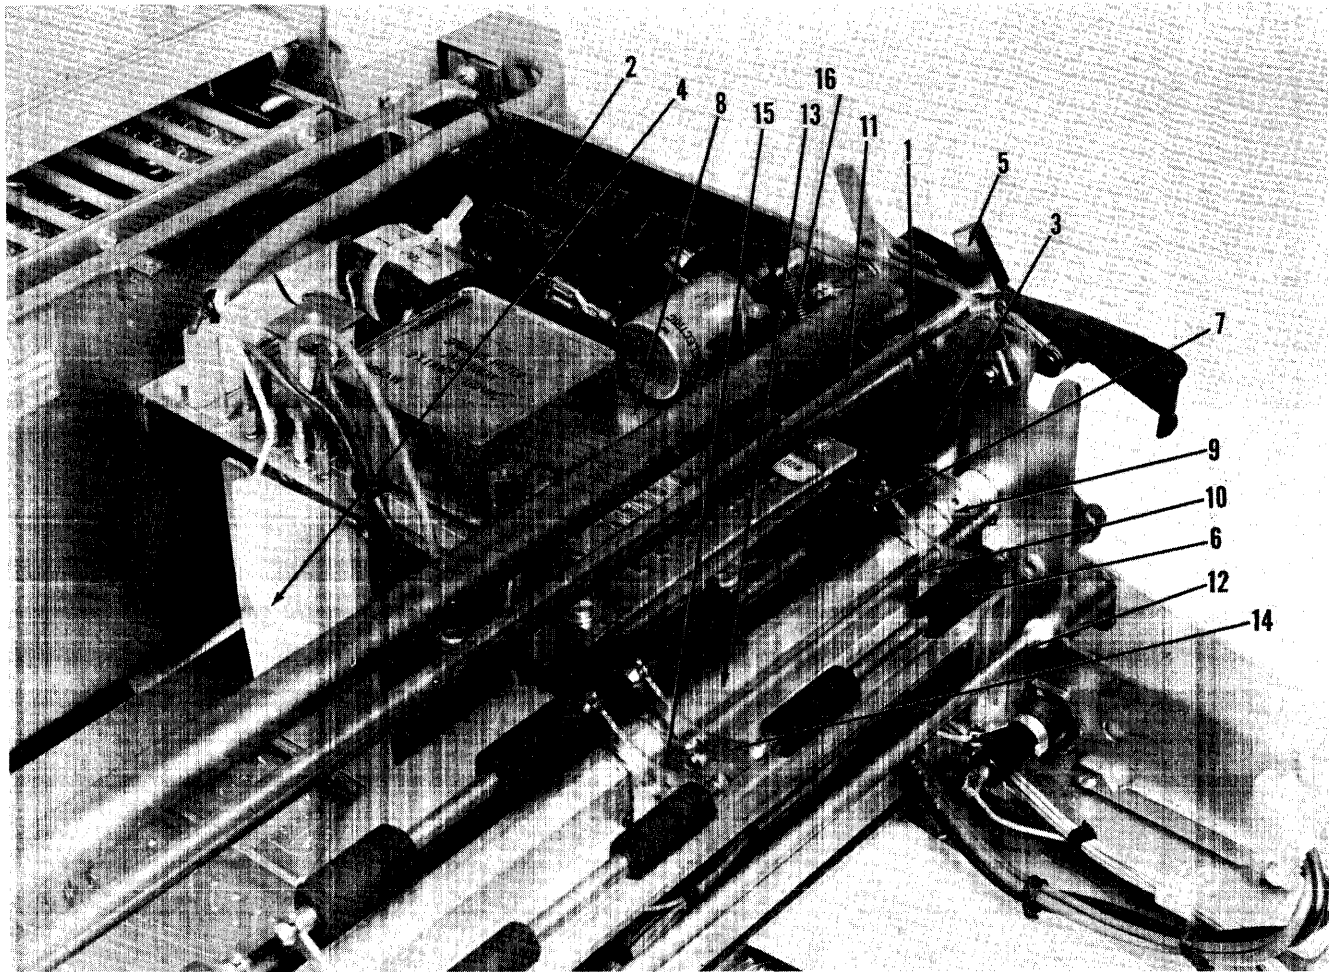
Frame Assembly Showing Pressure Rollers, TermiNet 300 Printer
